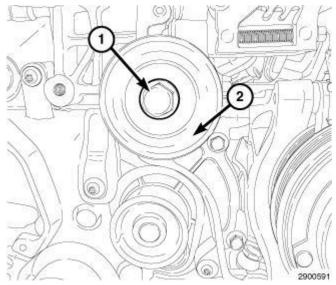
Idler Pulley & Bolt Courtesy of CHRYSLER LLC
